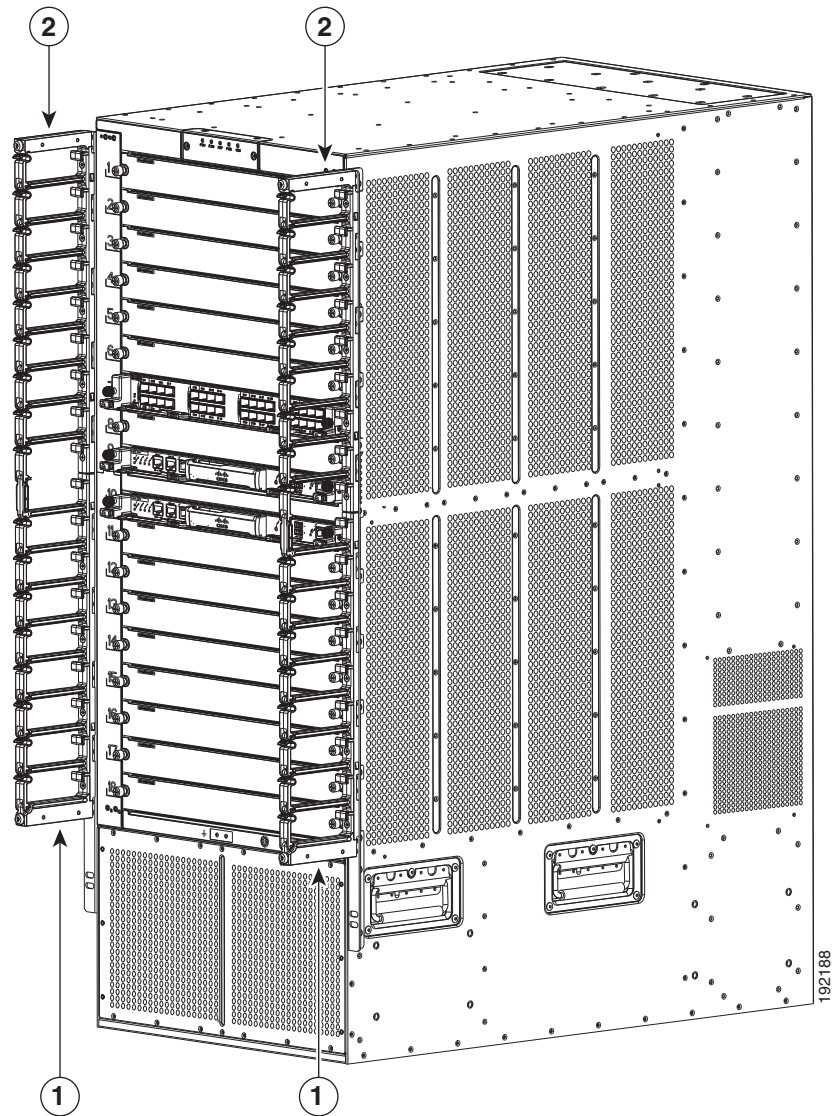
Attaching an Upper Cable Management Assembly to a Rack-Mount Bracket
